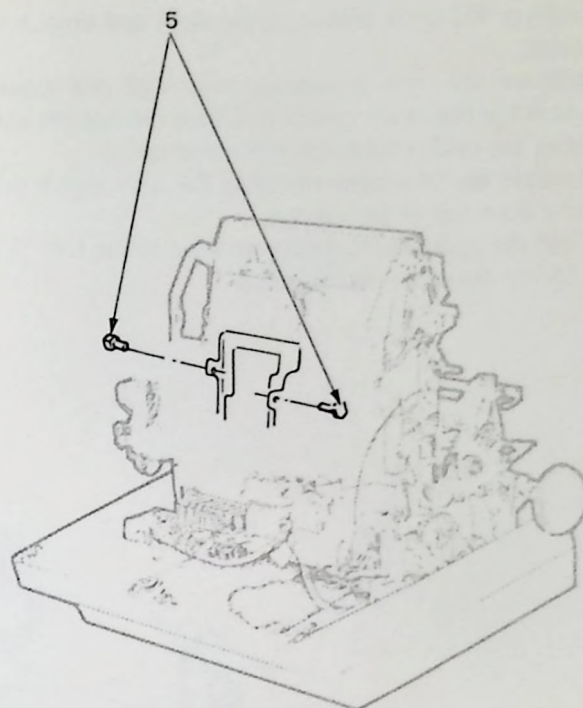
Cycle Clutch, Cycle Shaft & Drive Belt Removal
